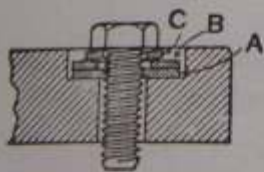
Enlarged view of recess in wood fixture for assembling bolt and washers: *A*, rubber washer; *B*, steel washer; *C*, lock washer.
